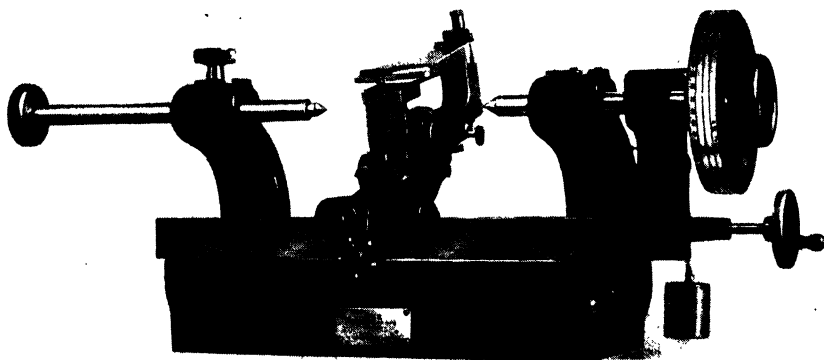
P.V.E. SCREW-PITCH MEASURING MACHINE
